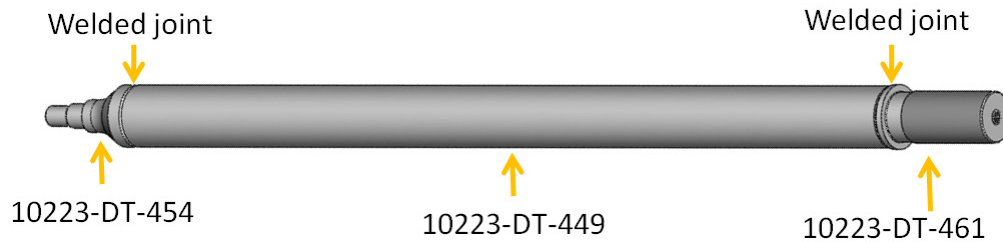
The upper strut assembly, 10223-AY-450, with components identified is shown [24].
